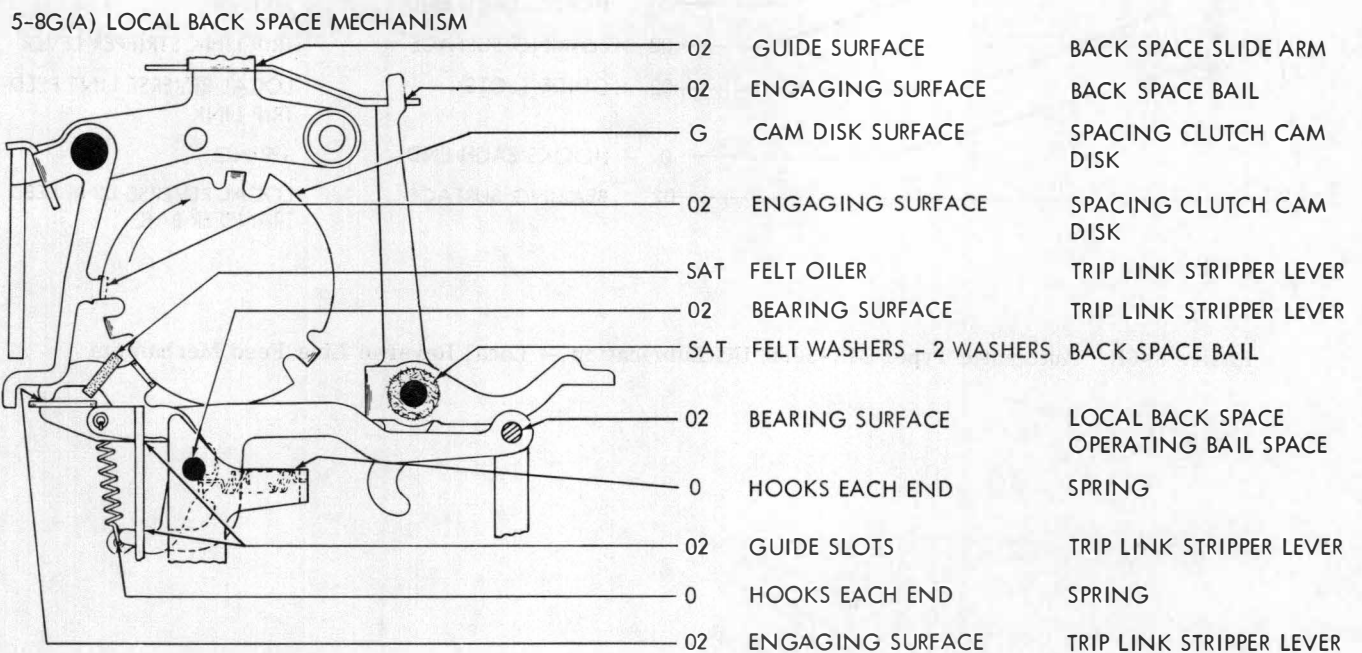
G. Keyboard MX-1677A/UG or Automatic Typewriter MX-3080/UG Lubrication —
